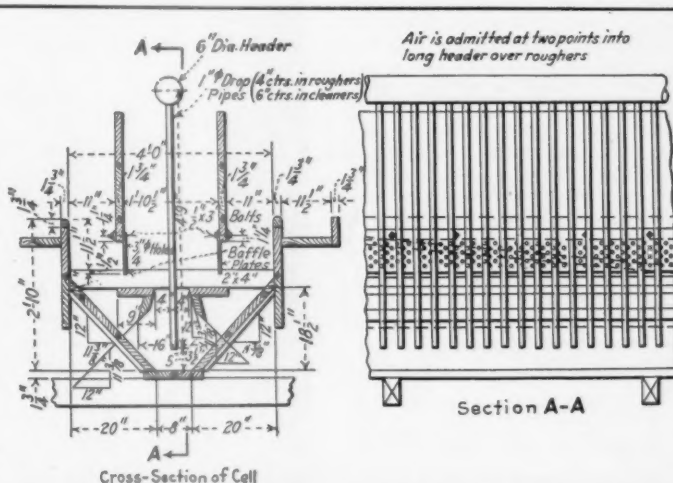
End elevation Forrester cell installation, Consolidated Copper Co., McGill, Nev.
